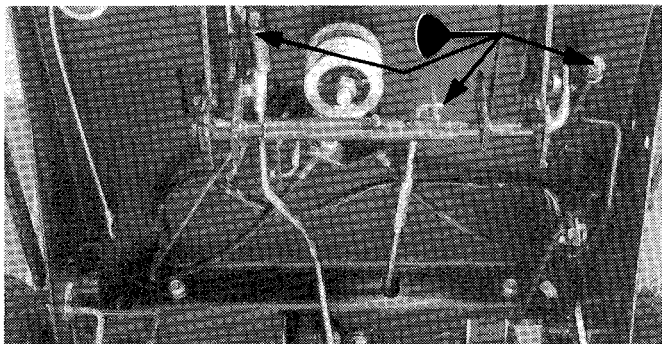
Lube Points Where Rods & Levers Contact Other Parts (Typical Pivot Points Shown Above)
